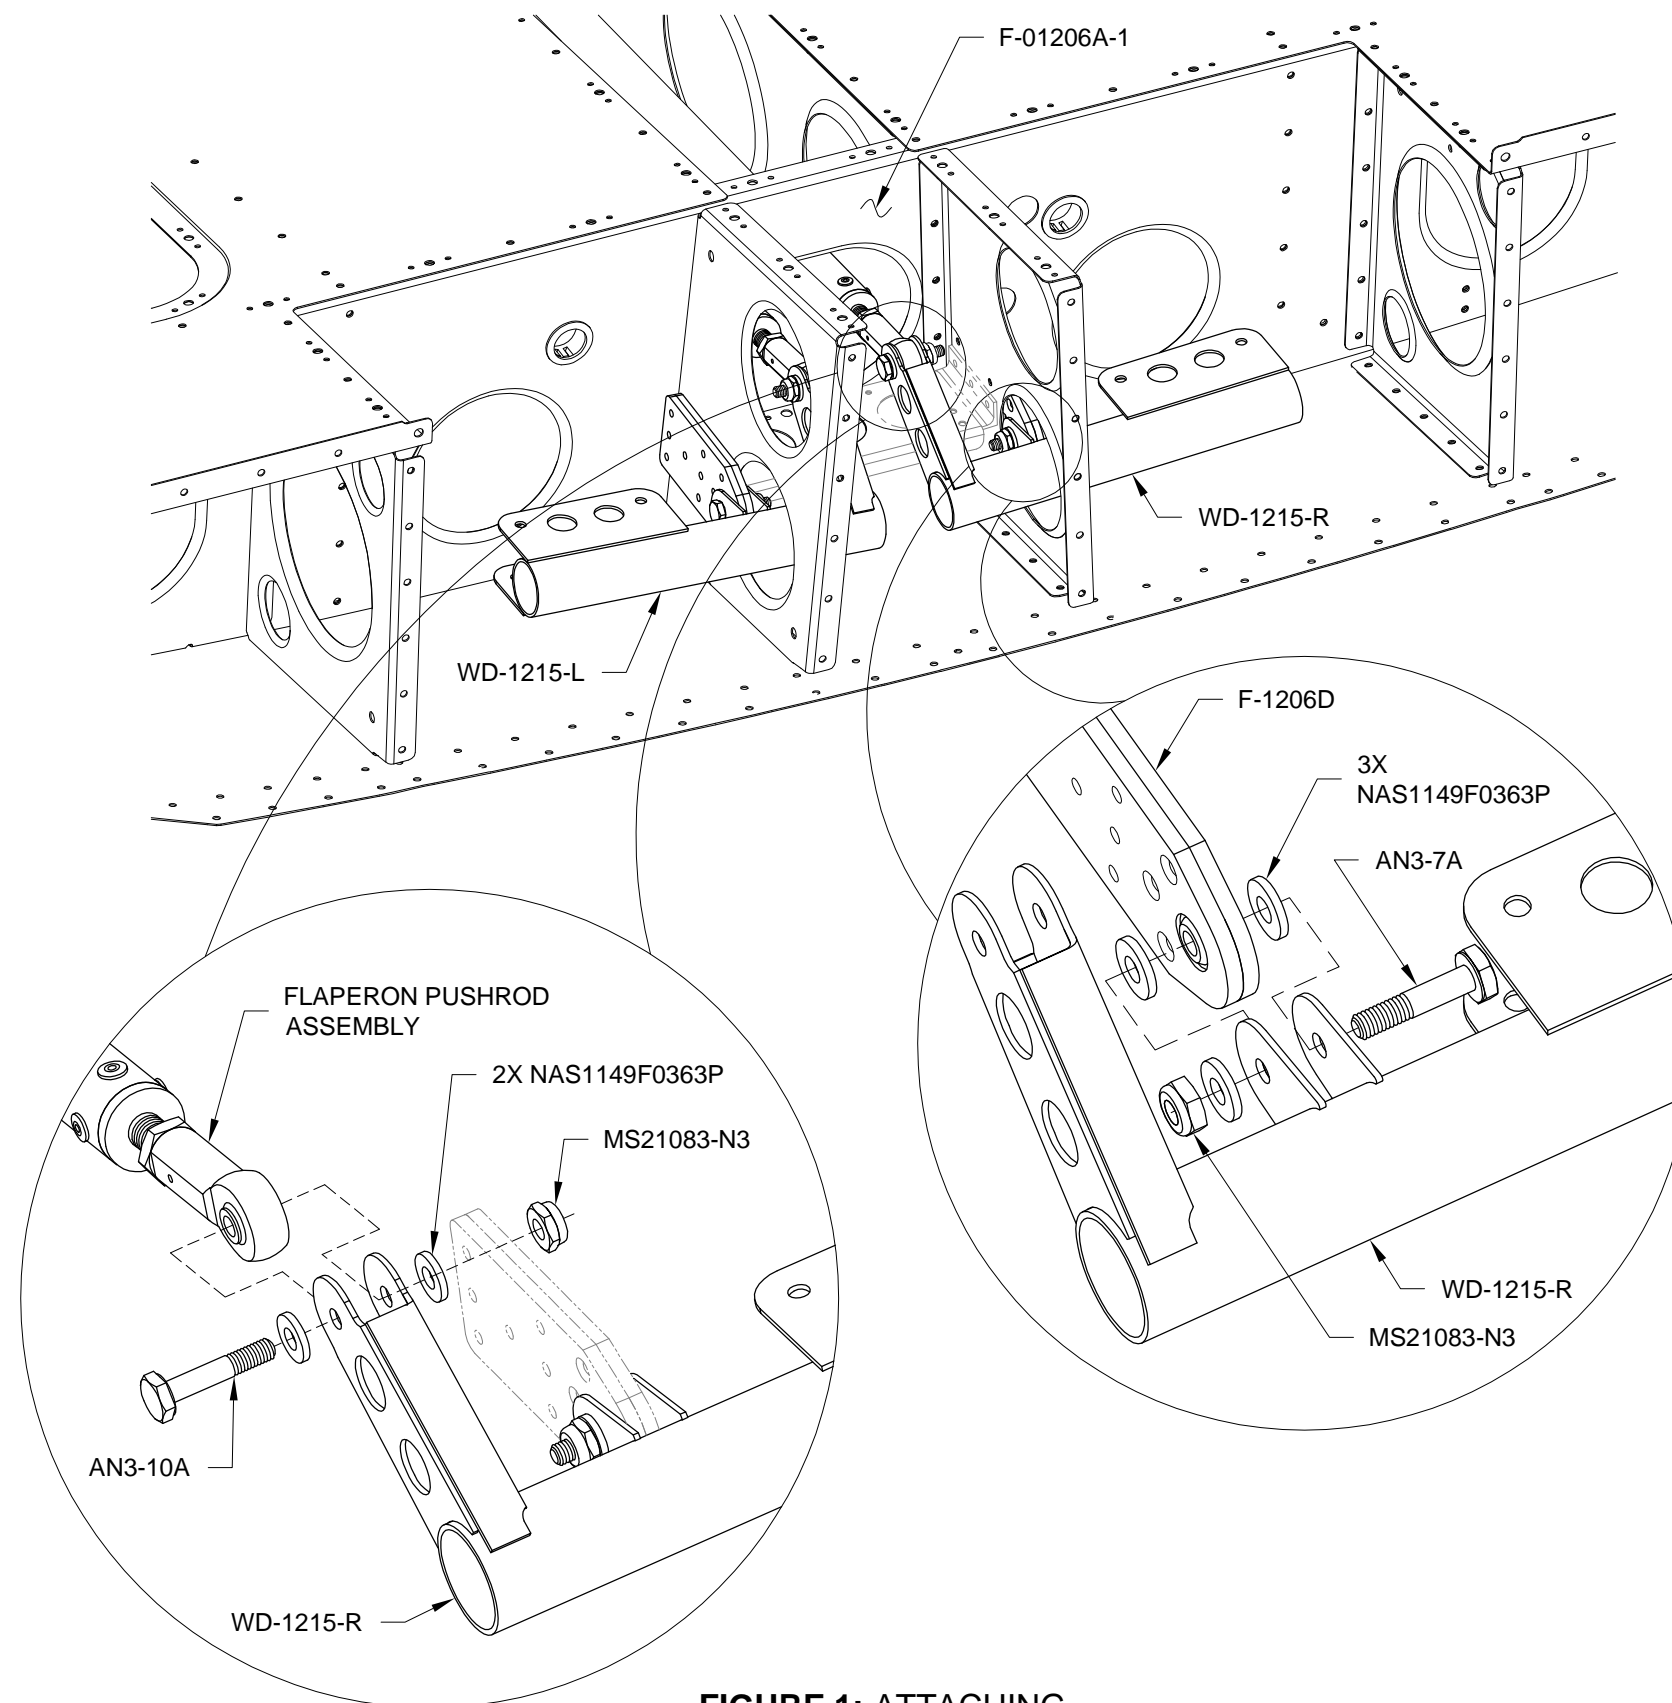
ATTACHING THE FLAPERON PUSHROD ASSEMBLIES
